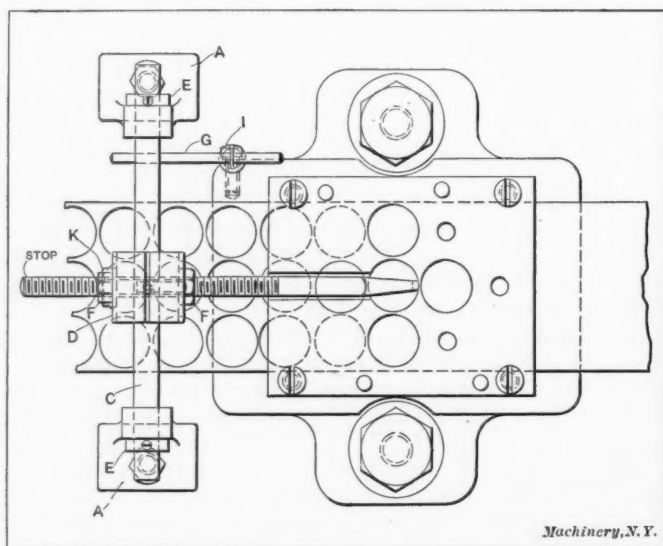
Plan View showing how Three Washers are blanked with One Stroke of the Press
